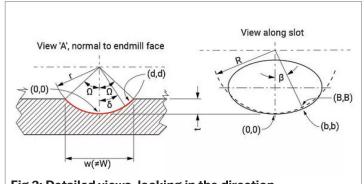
Detailed views, looking in the direction of the endmill face and along the slot.
